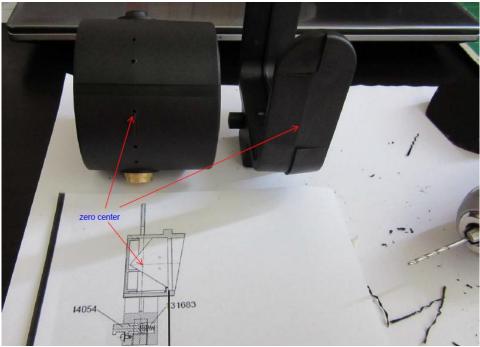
Deconstructed Leica GPH1 prism holder assembly to find the centre zero
